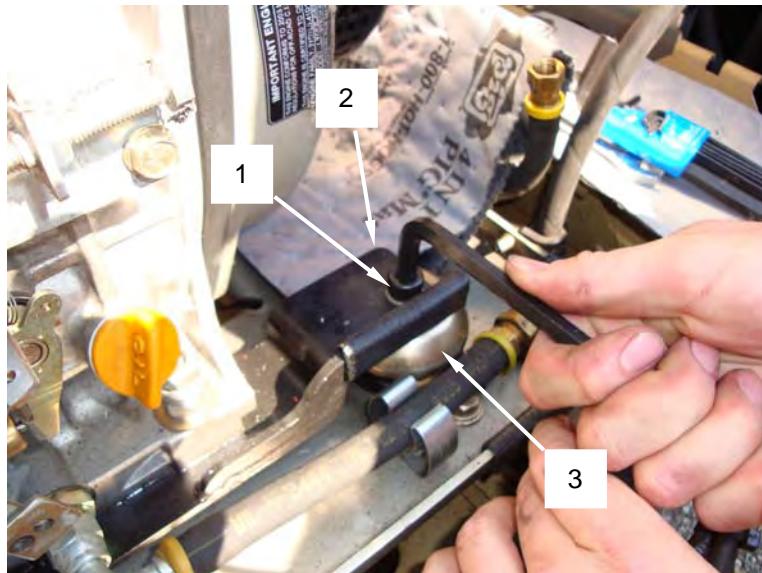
Remove Screws Securing Mounting Bracket to Engine Vibration Mounts.
